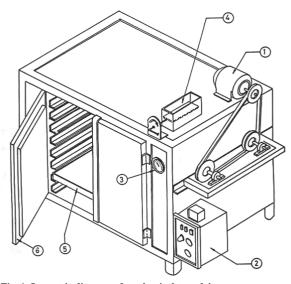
Isometric diagram of mechanical tray drier(1) Motor(2) Panel board(3) Temperature indicator(4) Hot air outlet(5) Tray(6) Door
